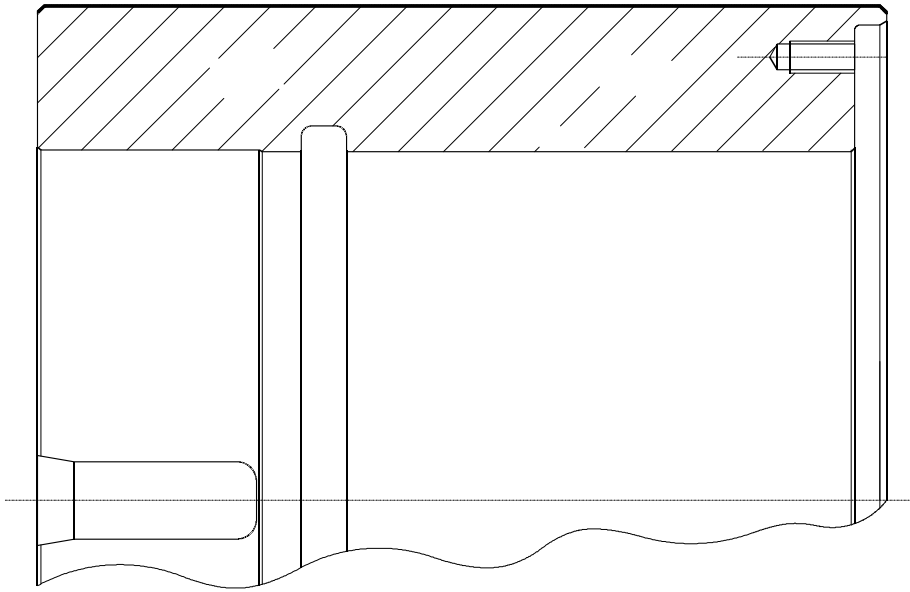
Sleeve modification with O-ring groove cut in sleeve only
